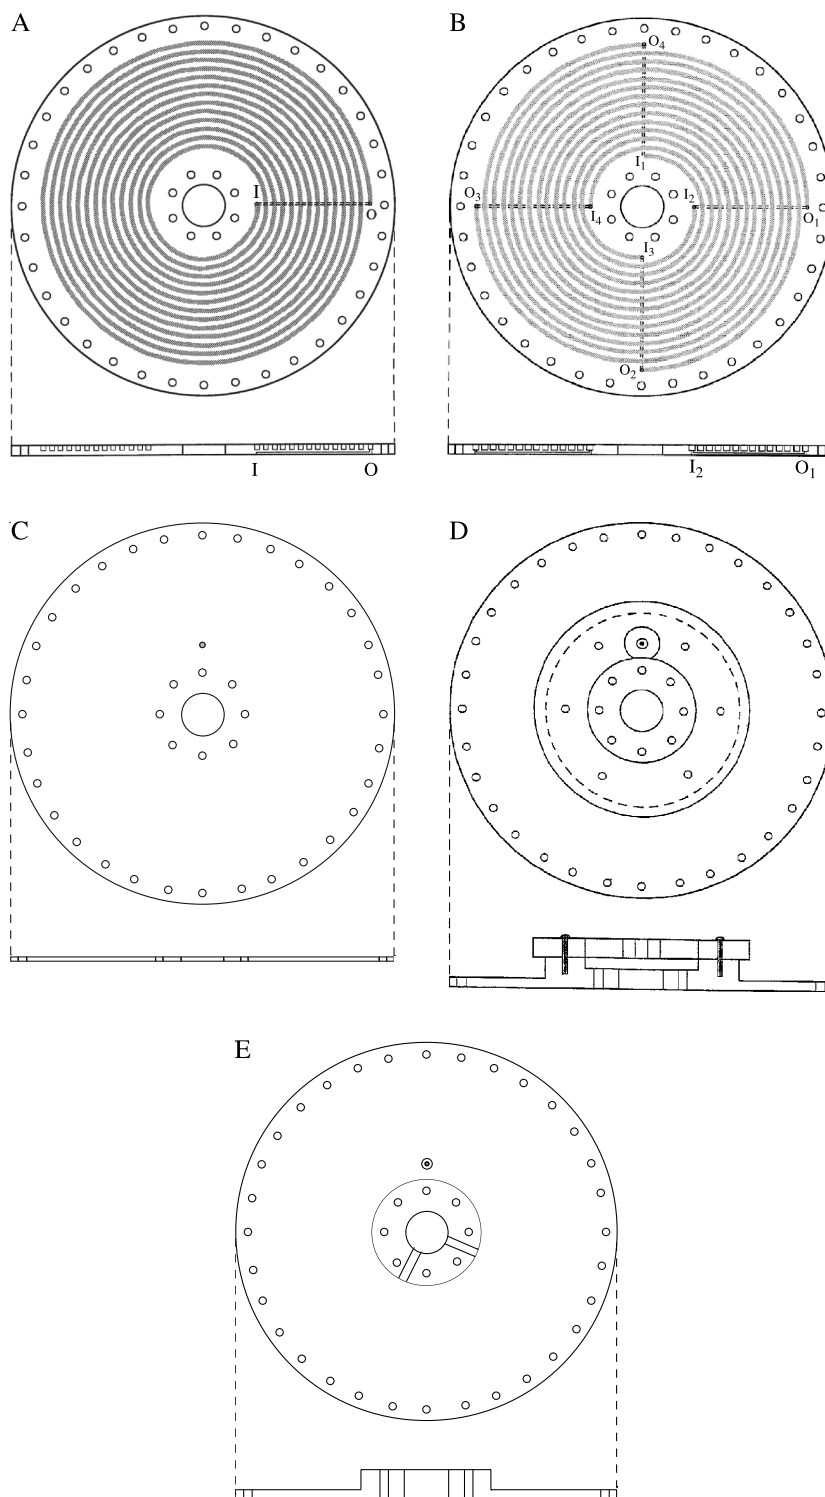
Drawing of each component of the spiral disk assembly. A. Disk with a single spiral, B. Disk with four spirals, C. Teflon sheet septum, D. Upper flange equipped with a plastic gear, E. Lower flange.
